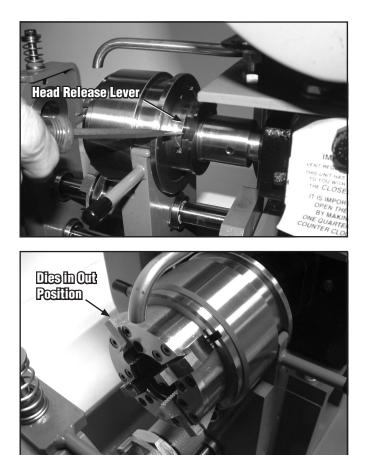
Moving die head to extreme position for chaser insertion by pressing head release lever
